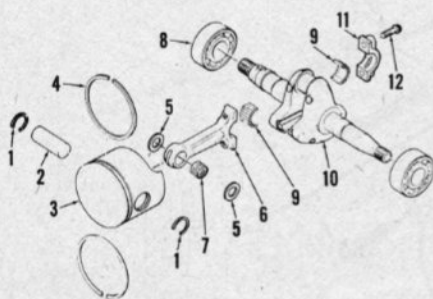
Exploded view of models PM105, SP105, SP125, SP125C and 895C engine crankshaft and associated parts.
